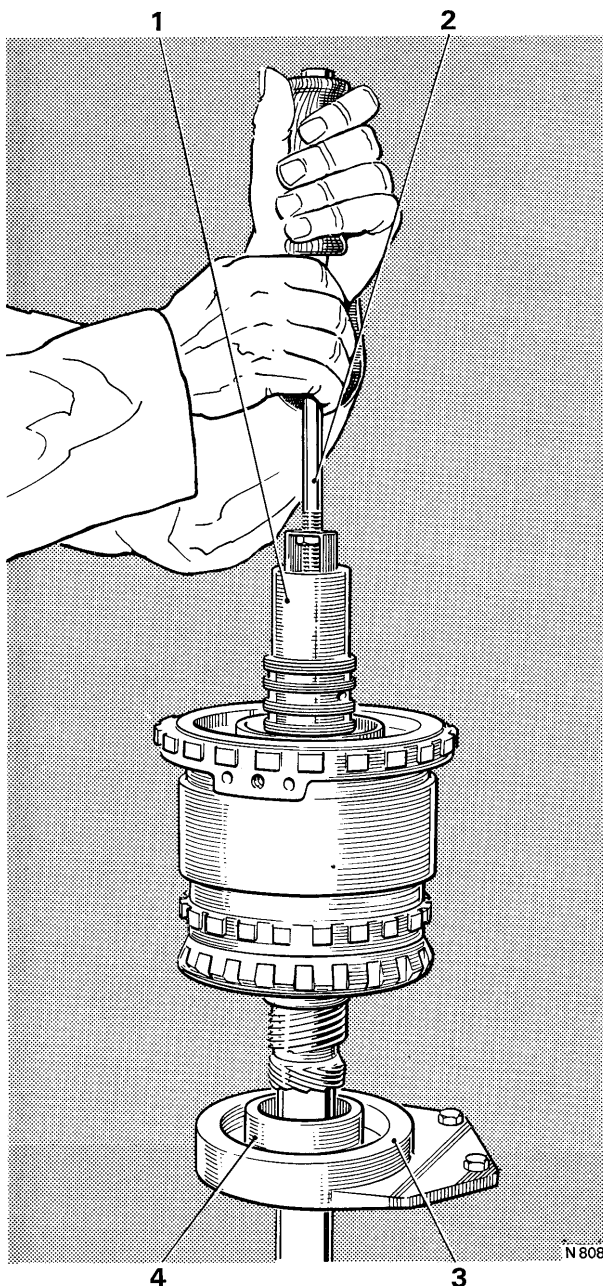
FITTING THE GEAR UNIT INTO THE HOLDING FIXTURE
